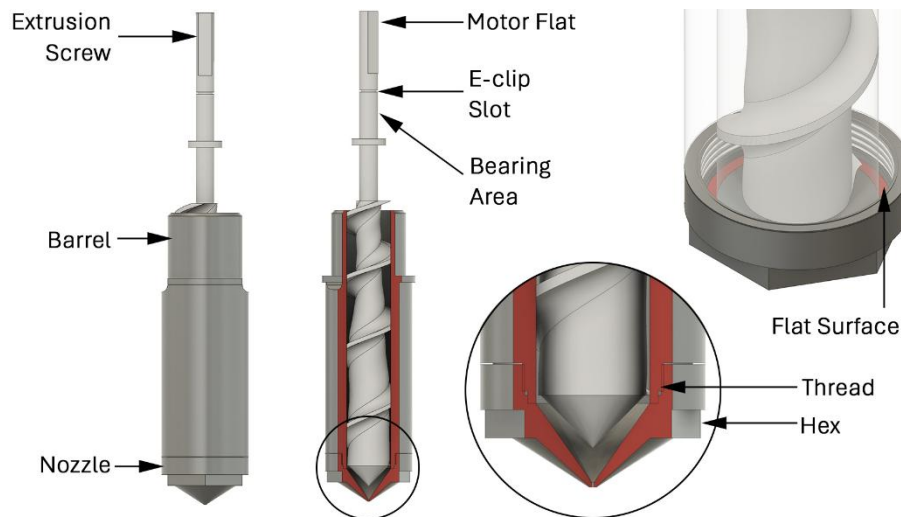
Extruder 2 barrel with screw and nozzle, with side, isometric and section views.
